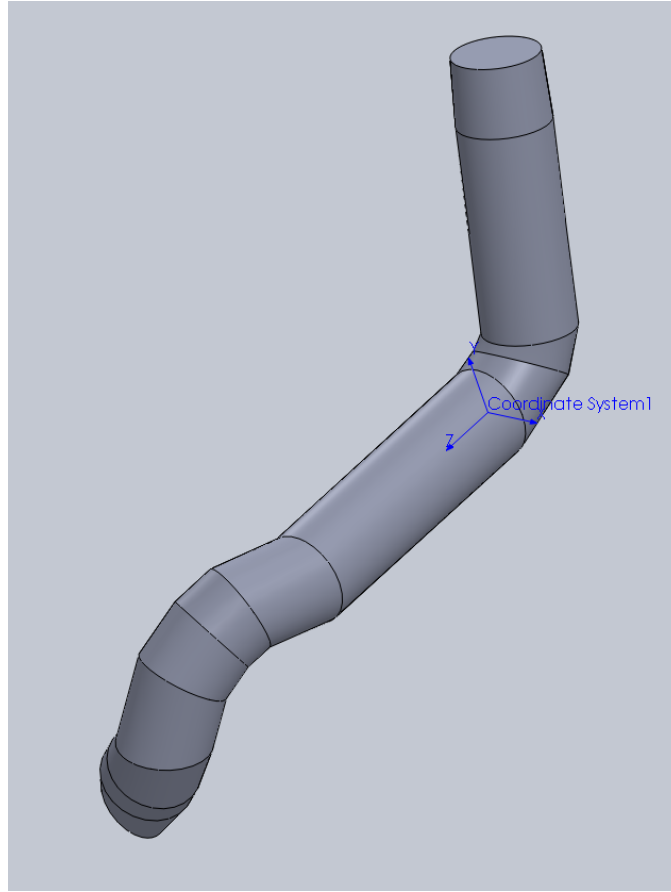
SolidWorks Drawing of a Single Exhaust Duct Used for Modelling in ANSYS.
